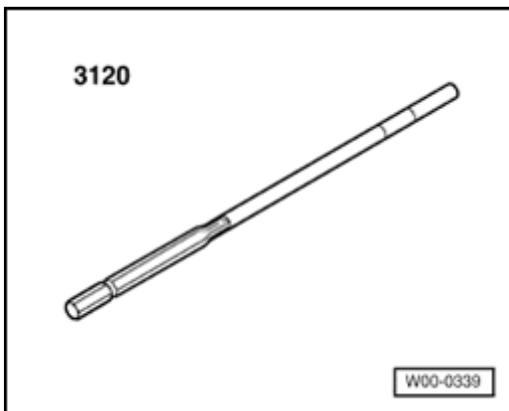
Identifying 3120 Reamer And Cutting Fluid
